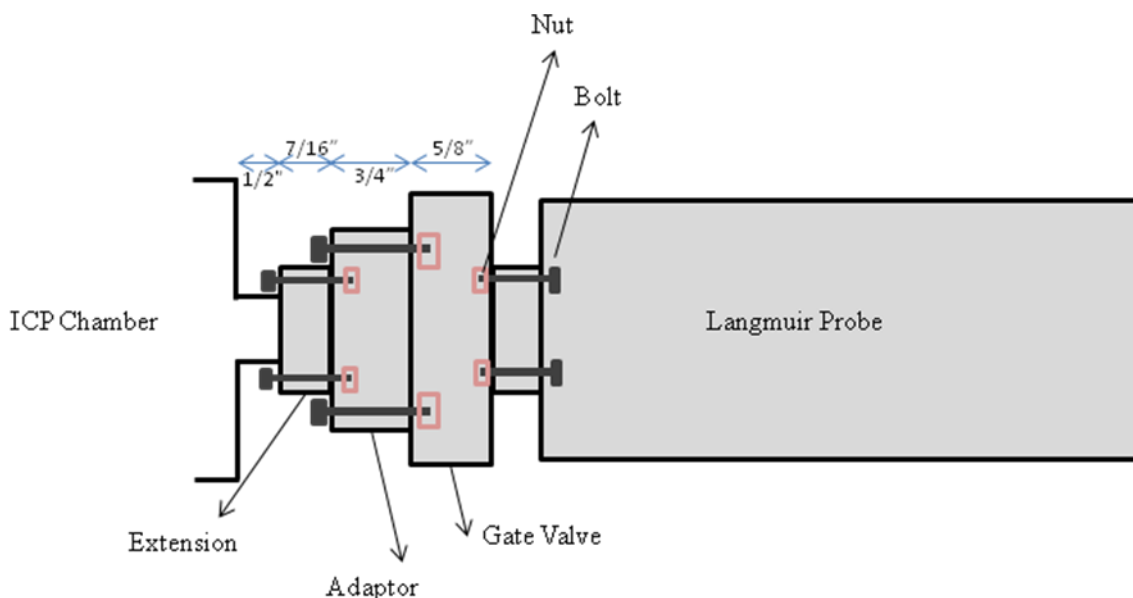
Schematic of Langmuir Probe System showing connection of components.
